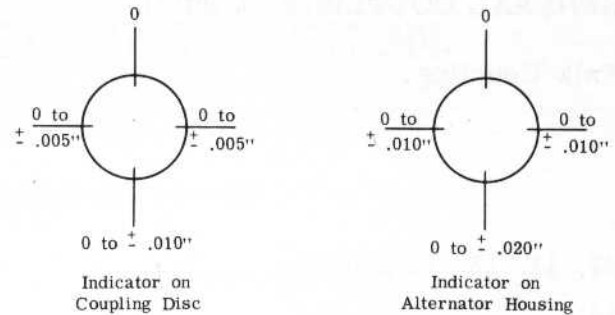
Dial Indicator Alignment Tolerances Model D15 And D15B Generators
